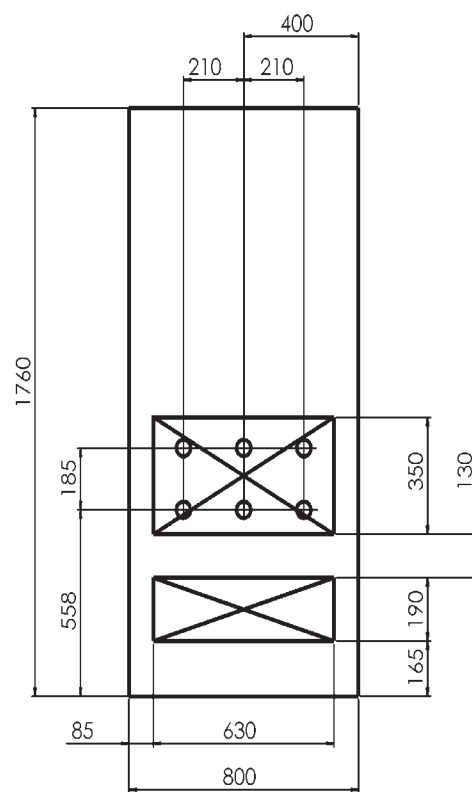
Feeder Panel with block-type CT or sensor, panel width 800 mm
